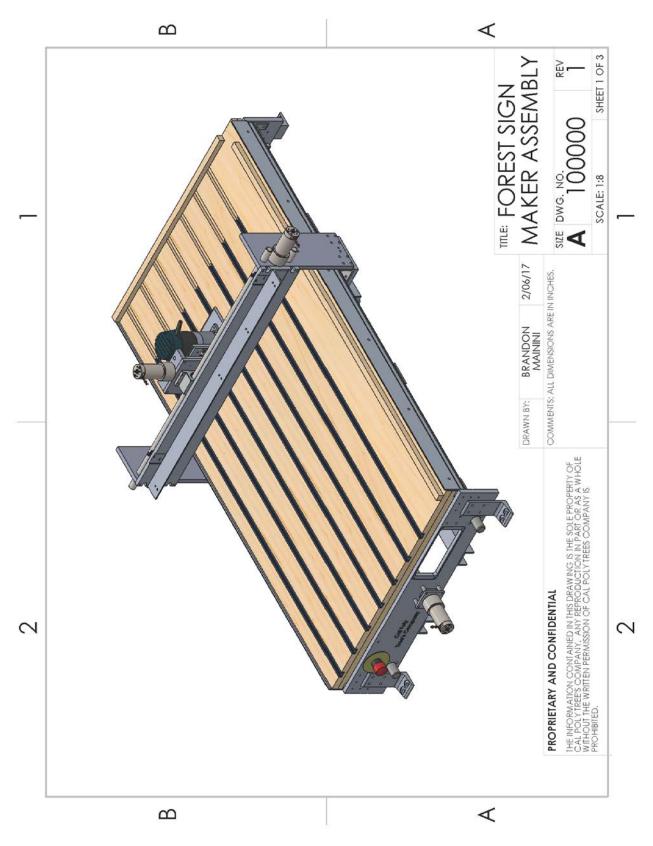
Forest Sign Maker Assembly Detail Drawing (Page 1 of 3)
